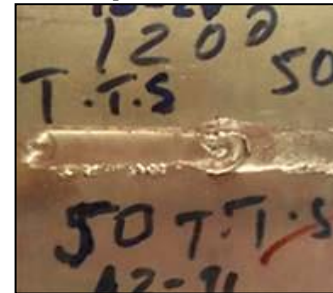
The weld made at 1200rpm at 50 tool traverse speed with similar welding Az91 alloy
